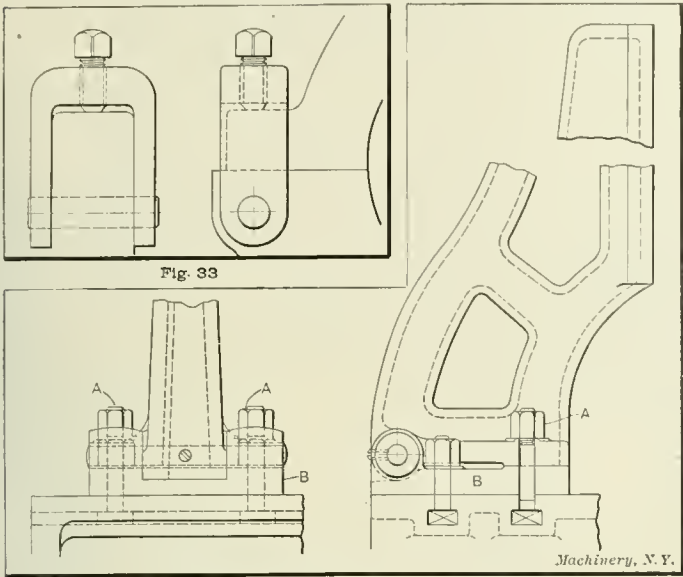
Eccentric Clamping Arrangement for Vertical Milling Machine Head
